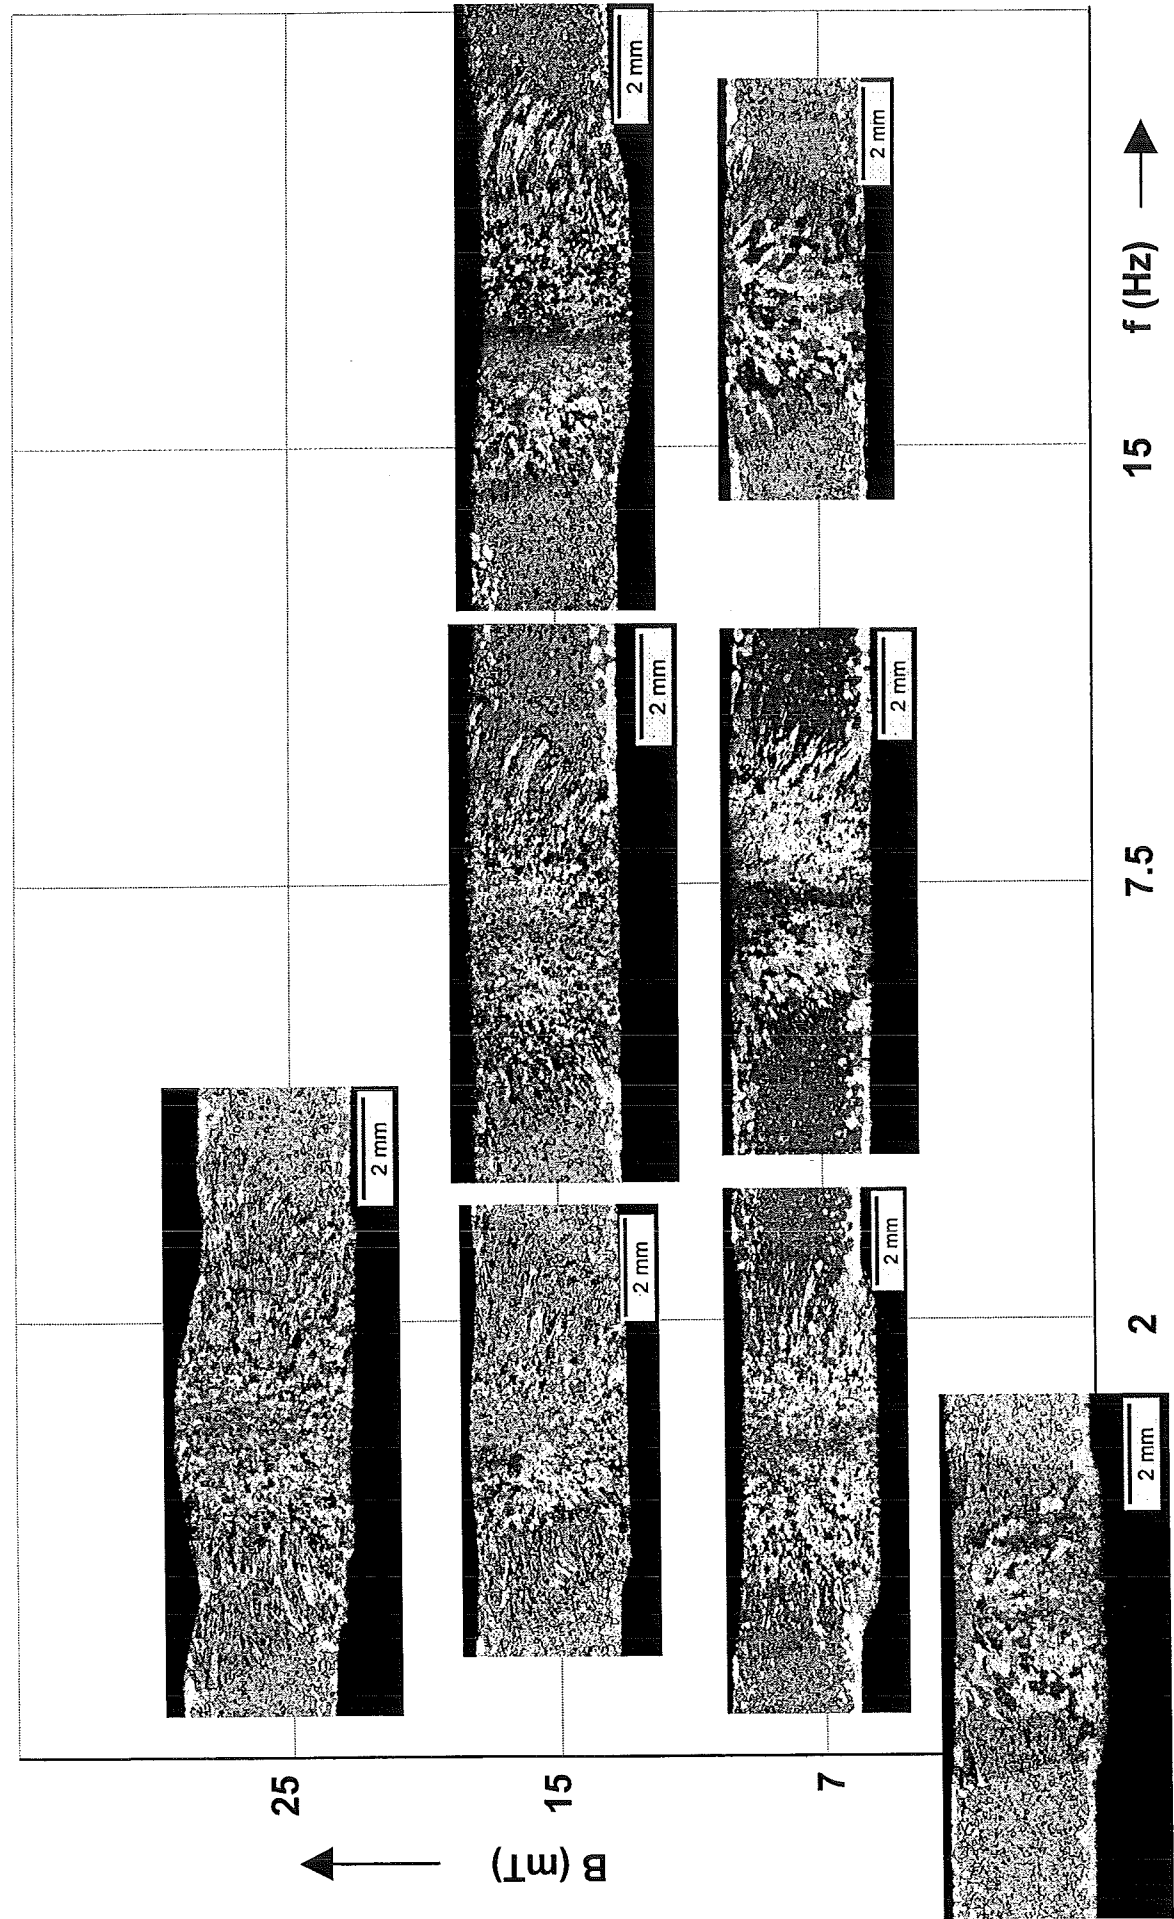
Top surface of AA 6060-T6 thin plate welds with and without EMS.
